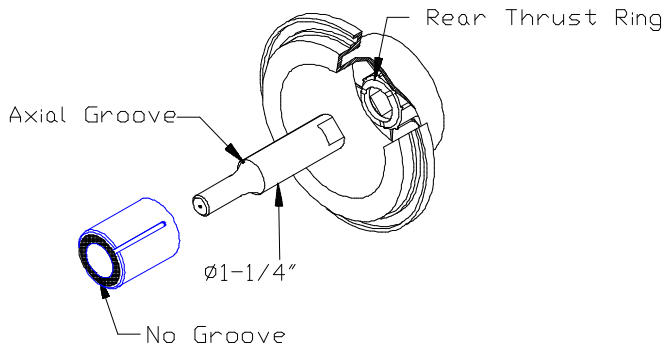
SiC Shaft/Containment Shell Assembly
